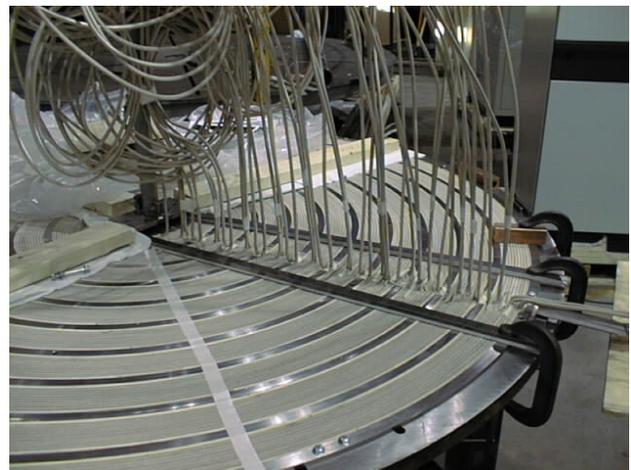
Photograph of single trim coil assembly taken during winding of the 10 concentric coils, prior to vacuum canning.
